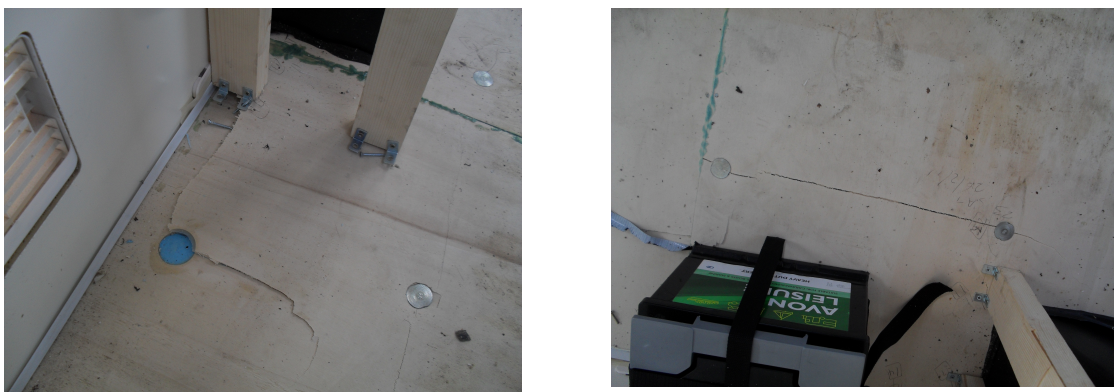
FAILURE OF THE PLYWOOD FLOOR IN THE ALKO SYSTEM
